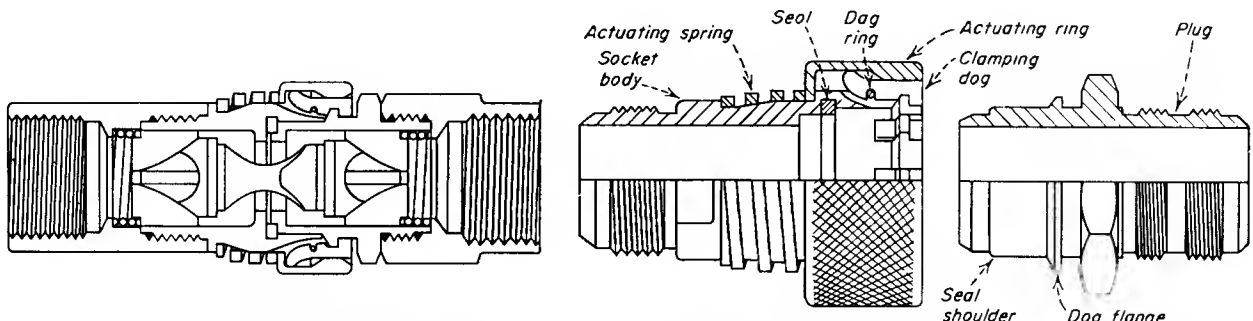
Coupler for fluid and air lines that must be broken at frequent intervals. To connect or disconnect, the actuating ring is pulled back forcing dogs open. Plug can then be inserted or removed. Sealing is accom-
